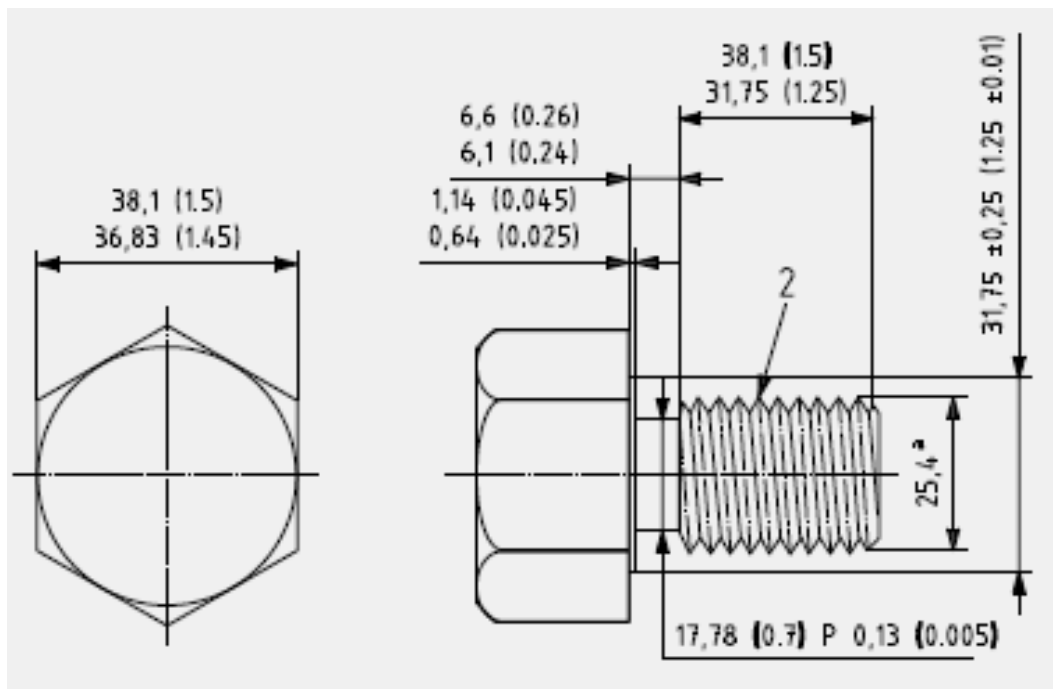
Test 5A3 3rd Edition Test Pieces [5]
